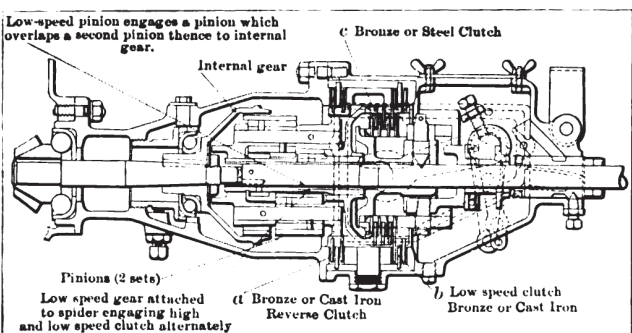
Planetary gear set, showing multiple disc clutches, system of gears, and screw system of engaging the high speed
